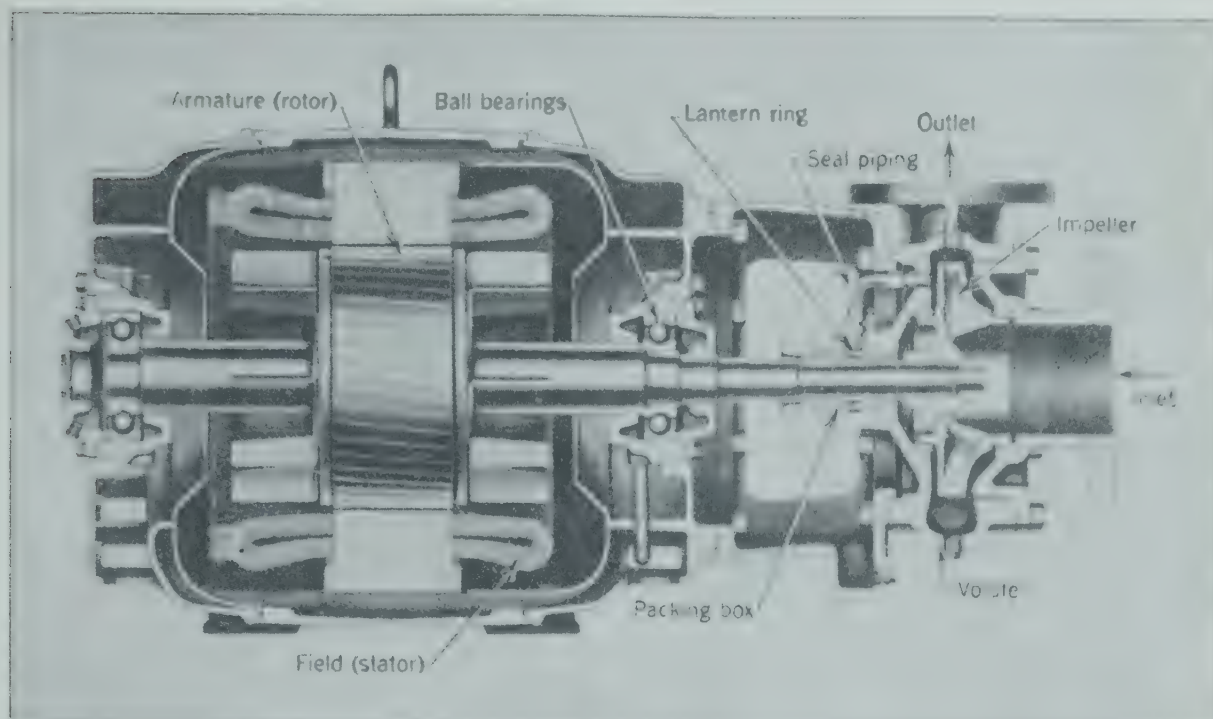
Sectional view of centrifugal pump built as a unit with motor. (Fairbanks, Morse and Co.)
